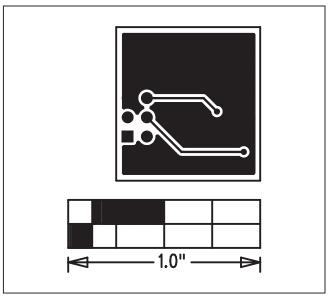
MAX44005 Daughter Board PCB Layout—Bottom
